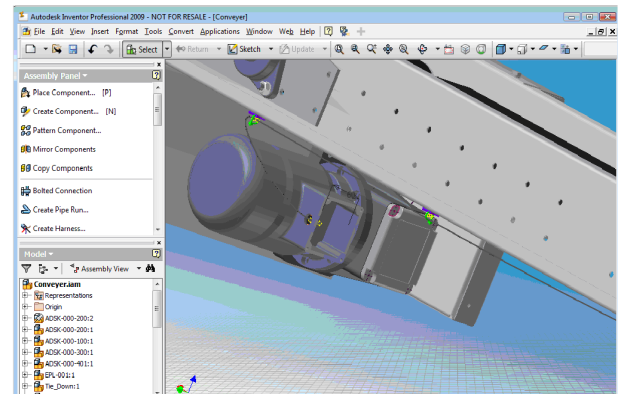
The designer responsible for electrical aspects places electrical engineering components
